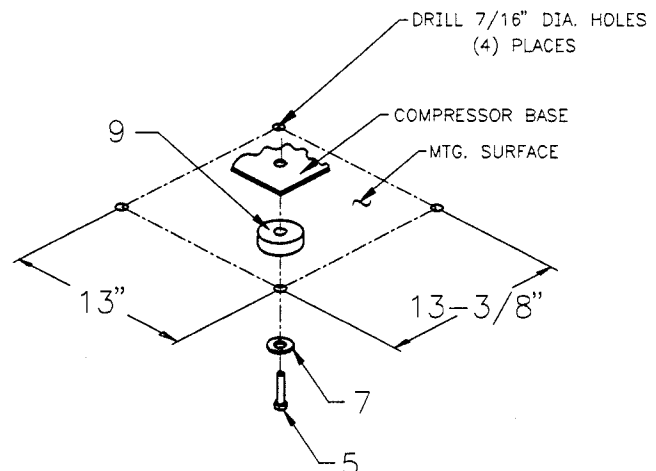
COMPRESSOR - MODEL 1154 DC10 COMPLETE (23115410)
